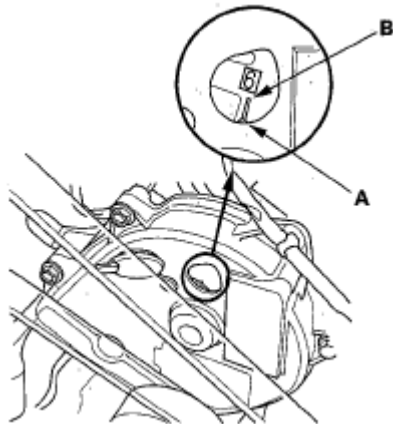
Aligning Front Upper Cover Pointer With No. 6 Piston TDC Mark
